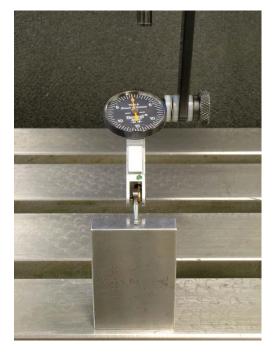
Using a dial indicator mounted on the spindle to "sweep" the table surface.
